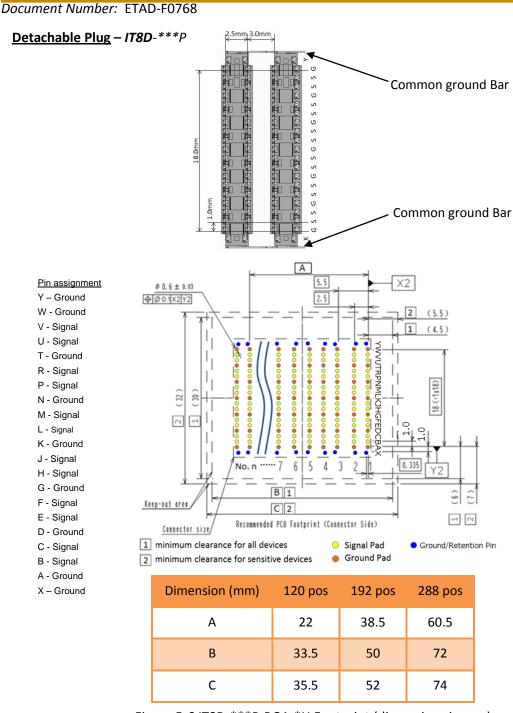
IT8D-*P-BGA-*H Footprint (dimensions in mm)
